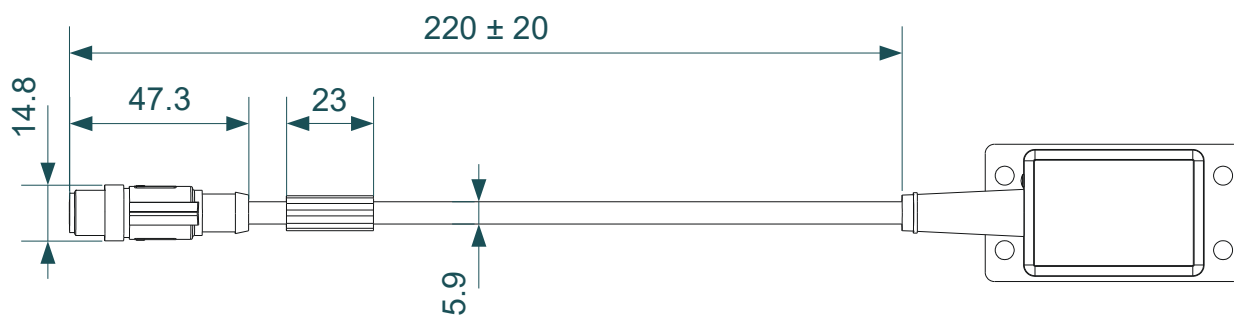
Dimensioned Sketch of connection cable small plastic housing (SP) (dimensions in mm)
